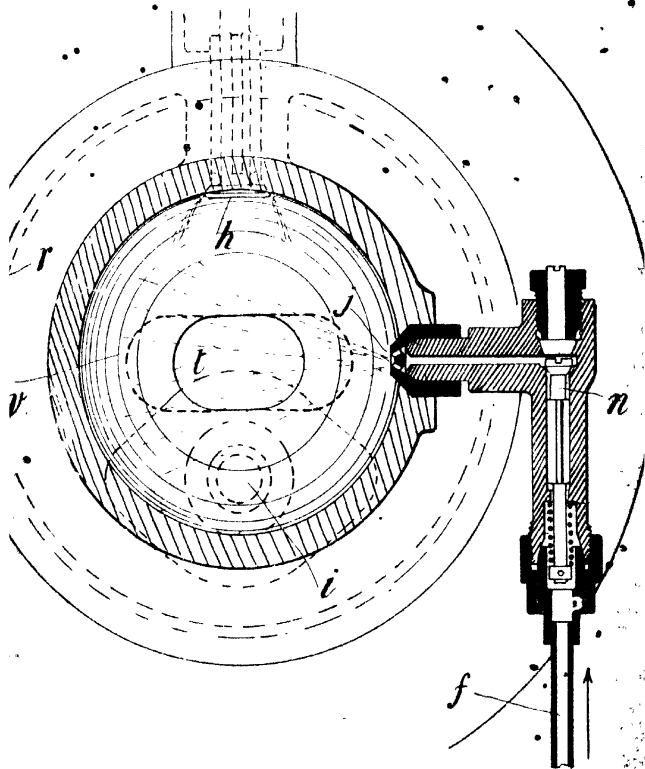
Cross-section of vaporiser showing injection nozzle used in the Crossley residual-oil engine.
